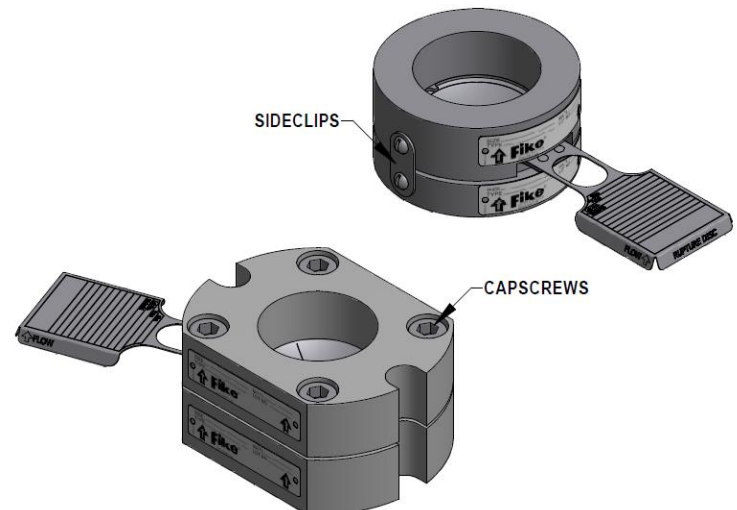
Insert Holder (Top) and Pre-torqueable Holder
